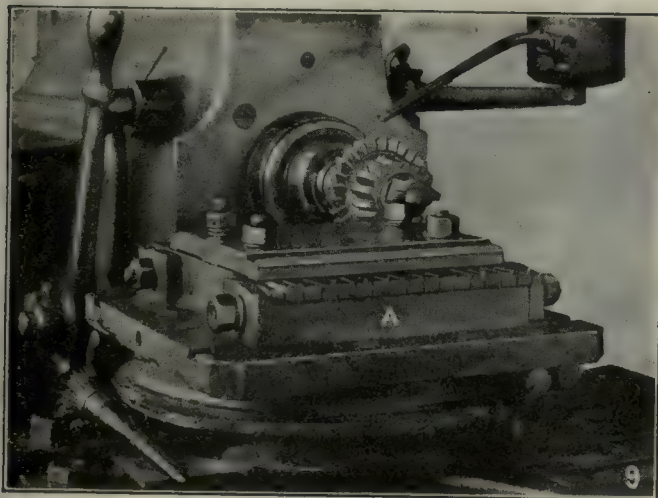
INDEXING FIXTURE FOR MILLING LATCH KEY
